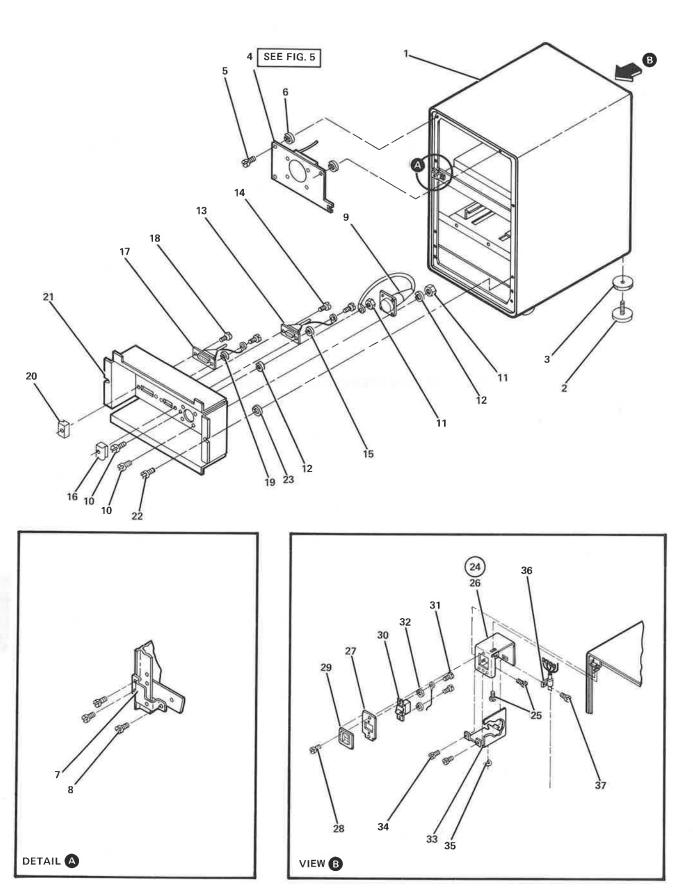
MECHANICAL ASSEMBLY. SEE LIST 2.
